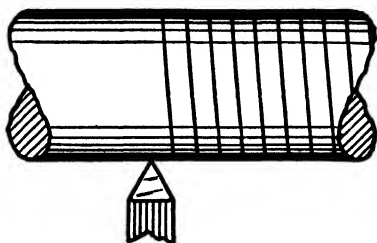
Making a trial cut to check the setup for thread cutting. (South Bend Lathe Works)
